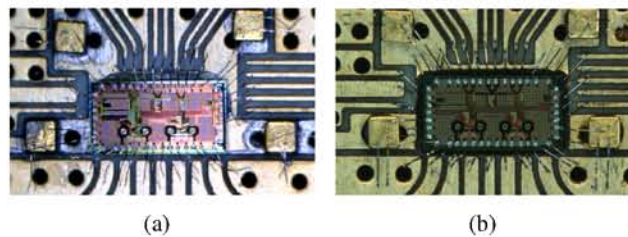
(a) The bonded die of the 2-channel EAM driver array, (b) bonded die inside a cavity with shorter bondwires
